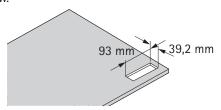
Cut out for installing LegaDrive Touch Inlay handset with rubber fins
